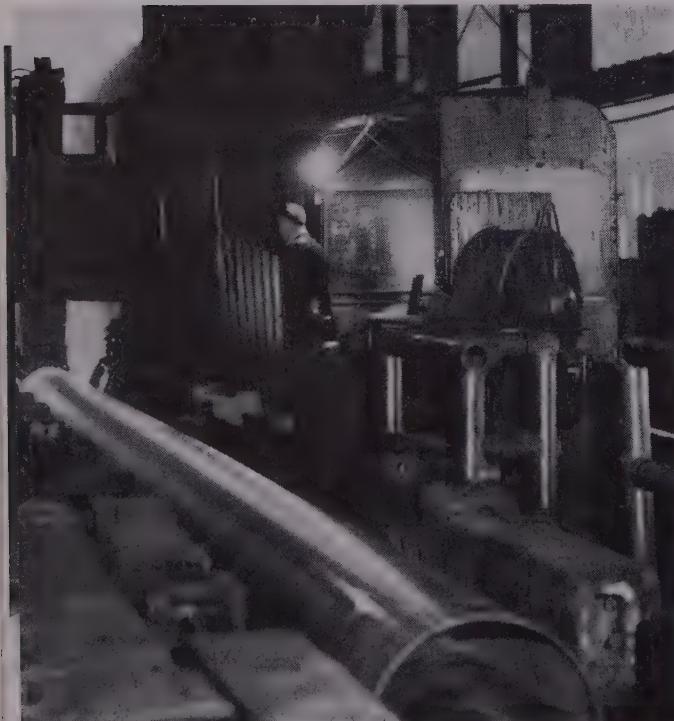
Reeling operation which smoothes out irregularities and burnishes surfaces of the shell both inside and out
